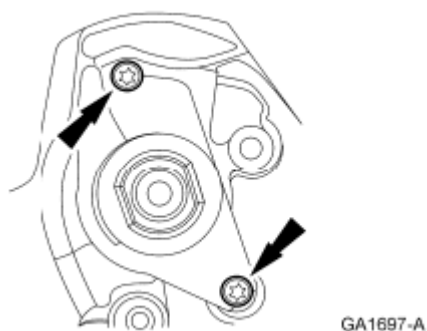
Locating Jackshaft Thrust Plate And Bolts
